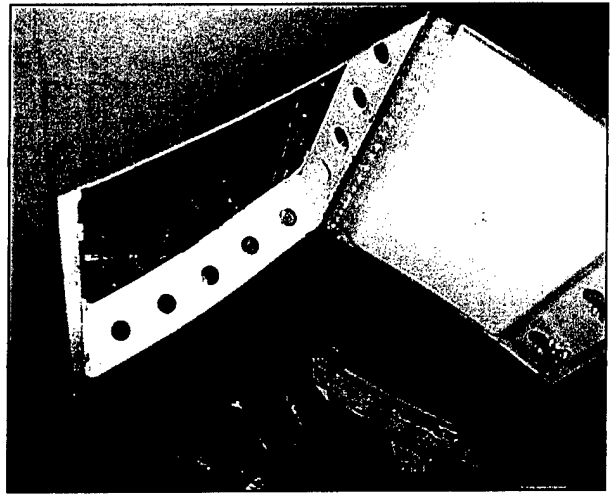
Fwd Main Landing Gear Pod: Inboard, bottom/side, access.
